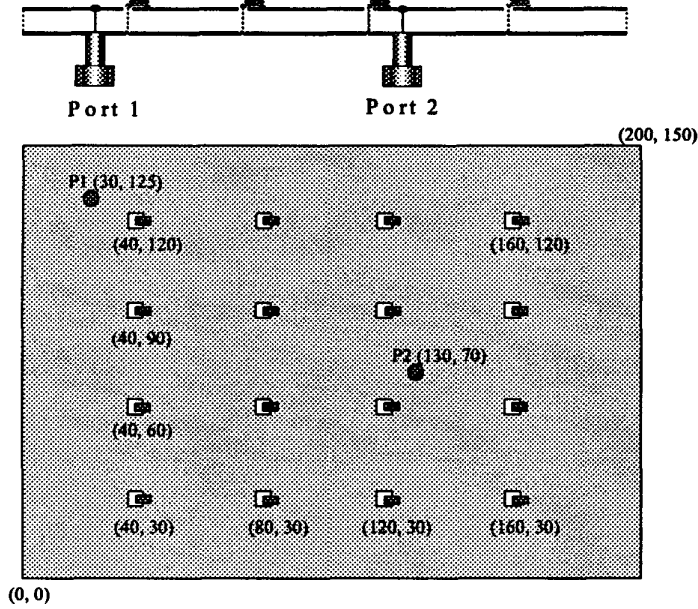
Schematics of the test board – side view and top view. All dimensions are in mm.
